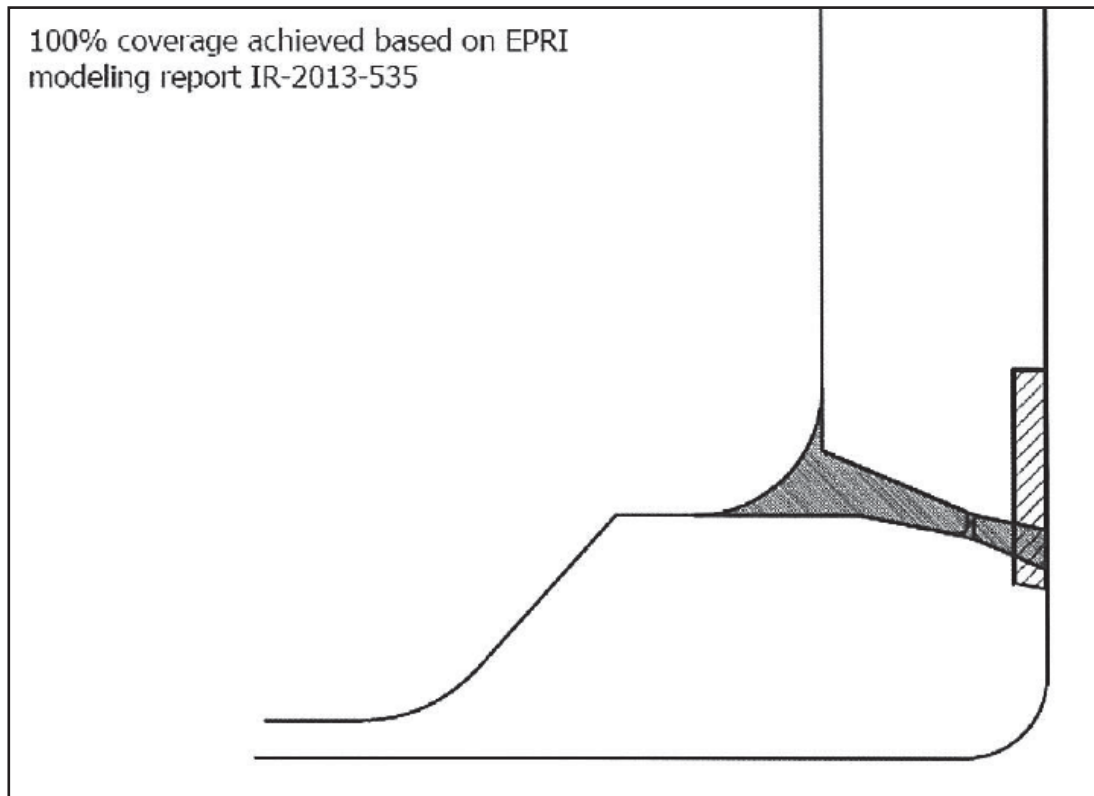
Weld N2D-NV, Lower 15% Coverage
